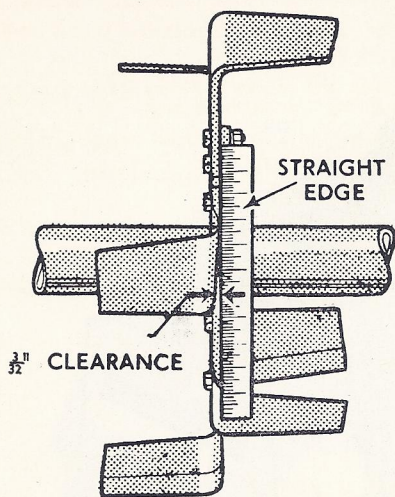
Checking blade alignment with straight edge (or setting bar.)
